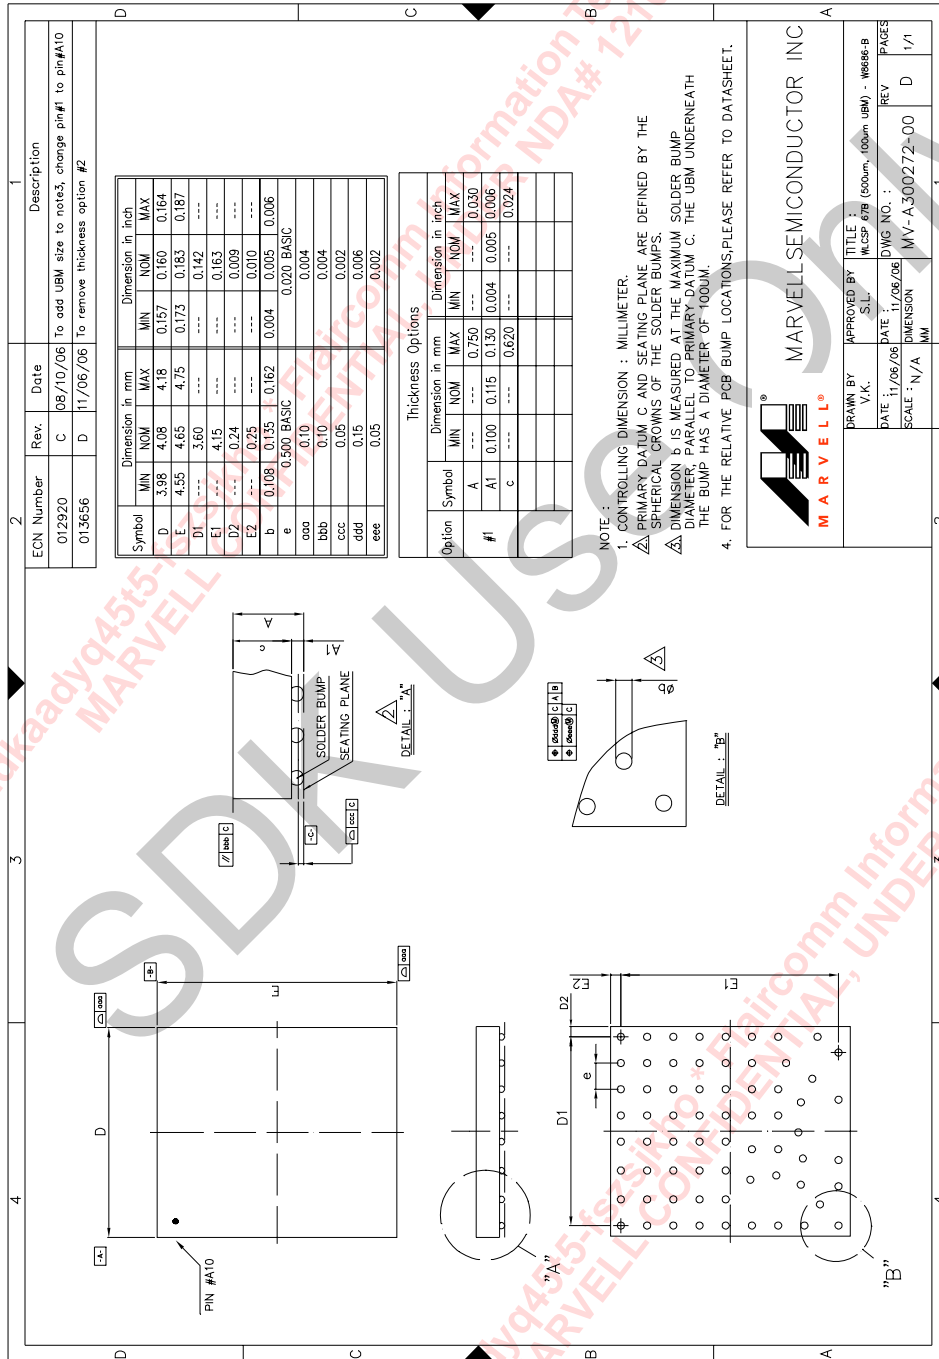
Flip Chip Mechanical Drawing—500 μm Pitch (220 μm UBM)
